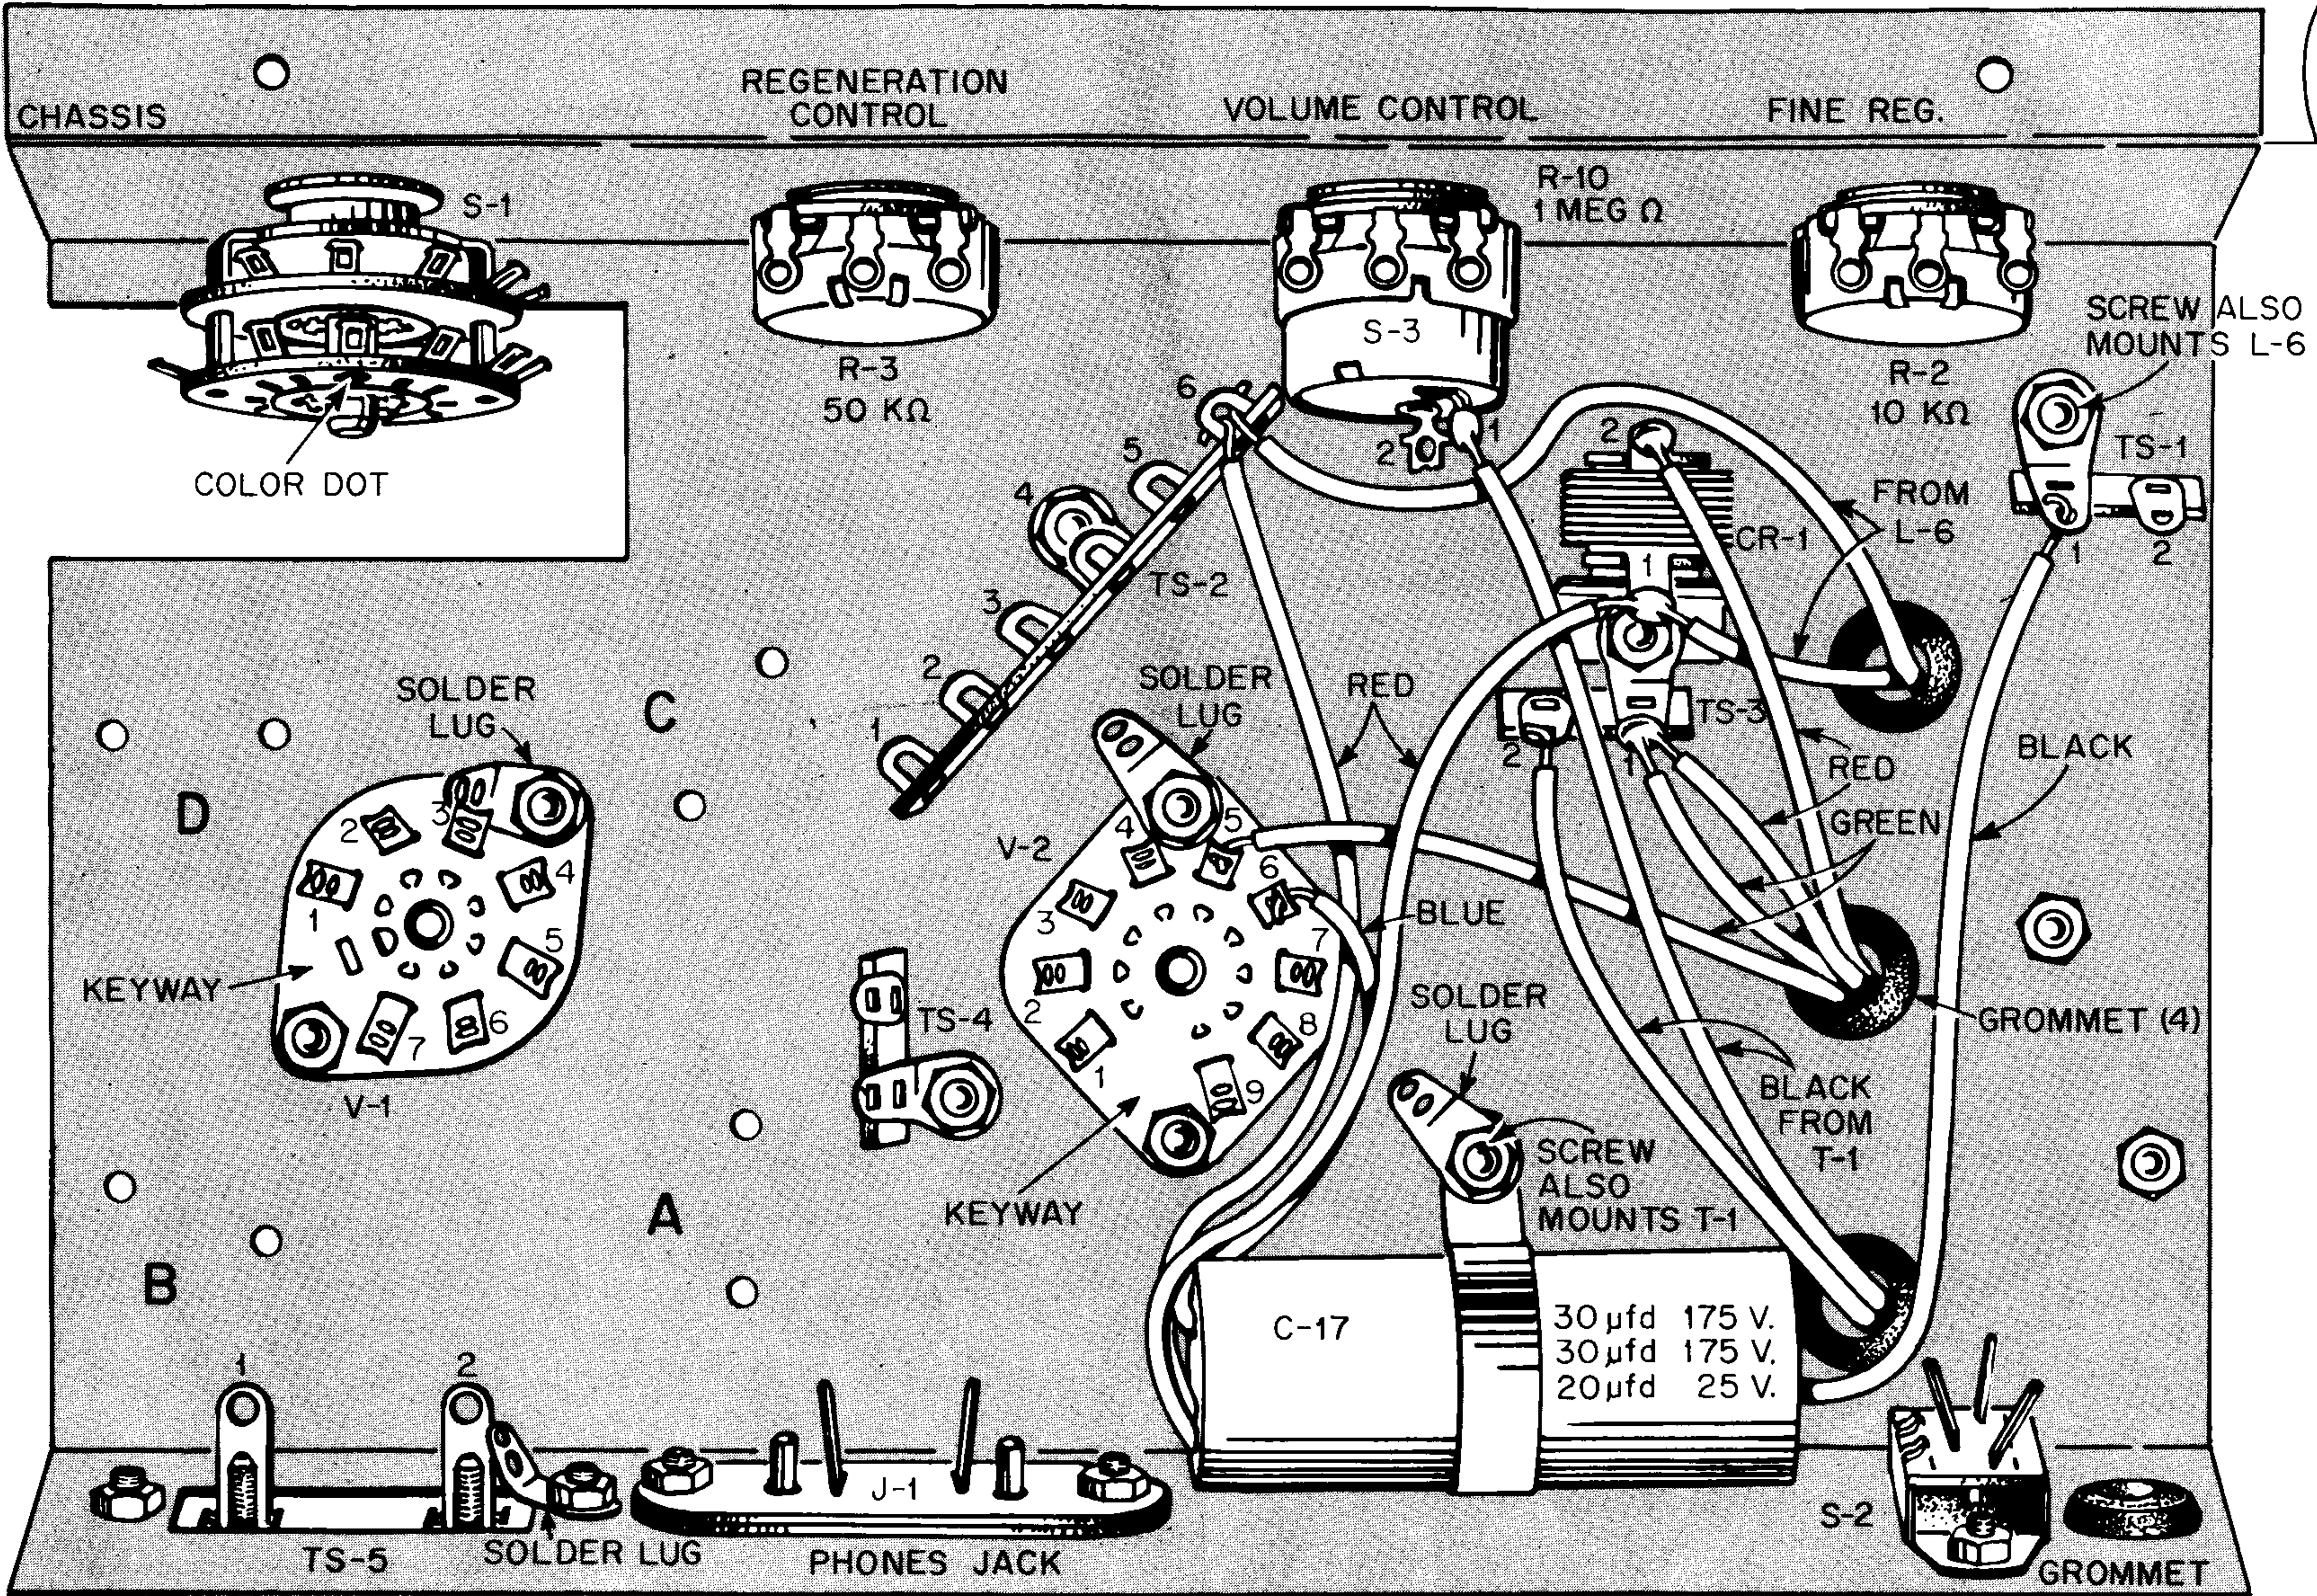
FIRST PARTS MOUNTING AND WIRING VIEW
